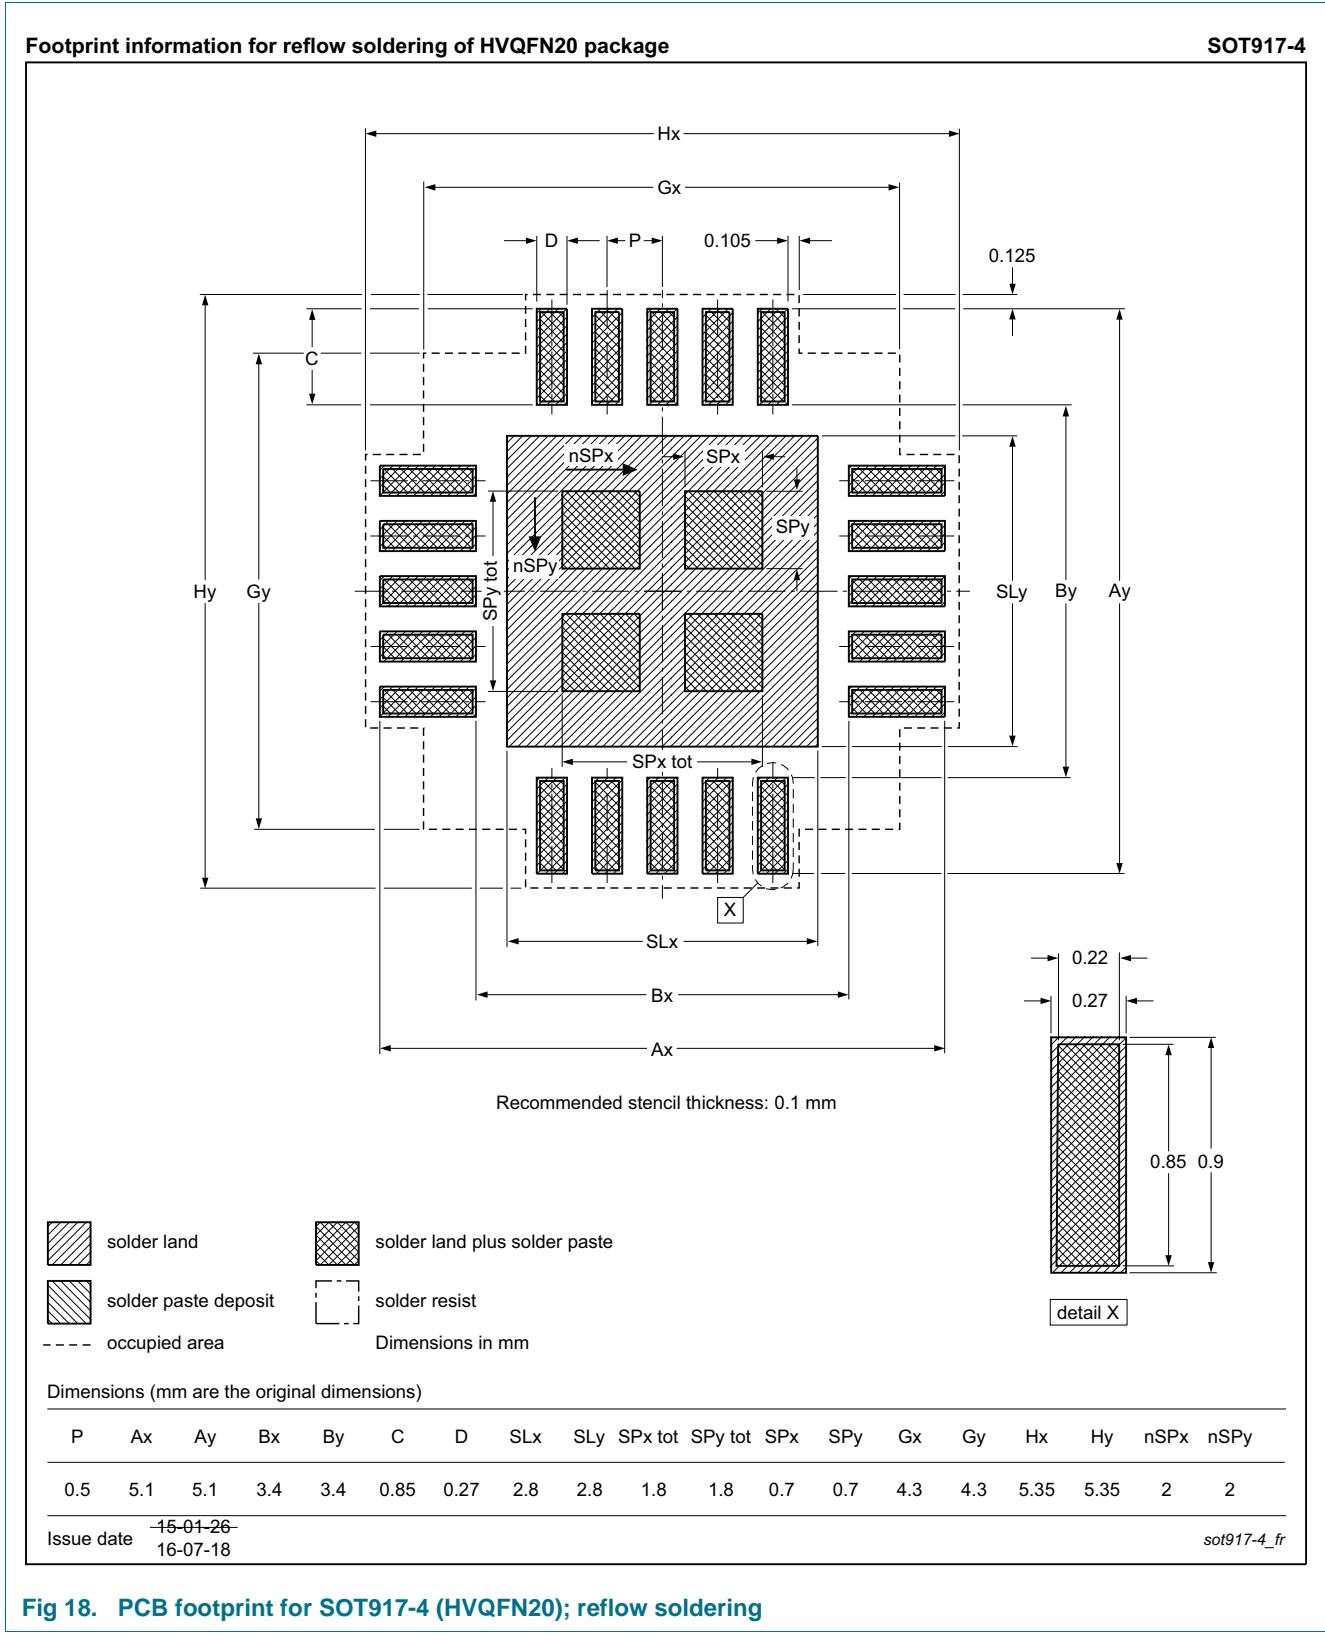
PCB footprint for SOT917-4 (HVQFN20); reflow soldering
